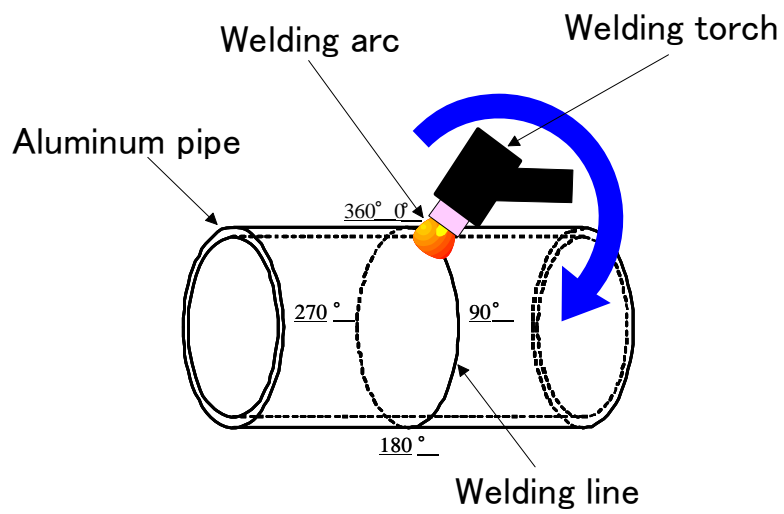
Circumferential TIG welding of pipe
